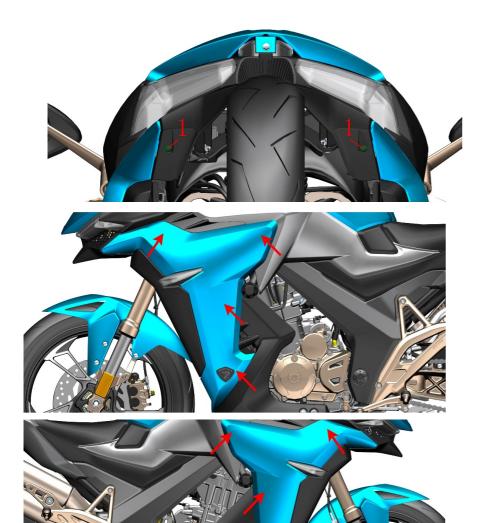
SURROUNDING COMPONENT		Envelope panel assembly	СНК	0
